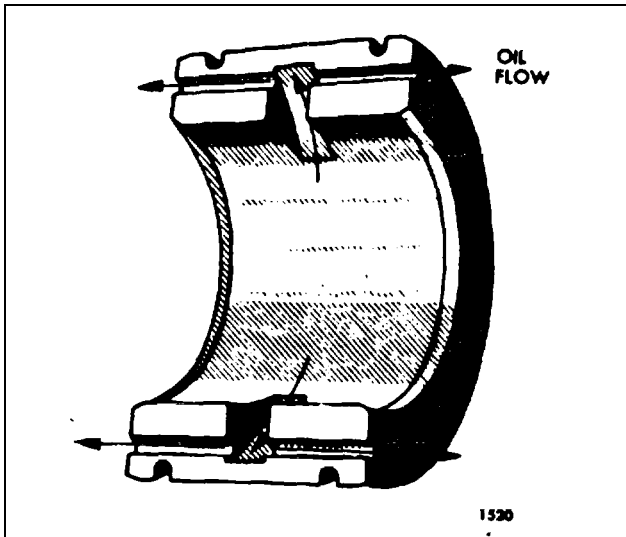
Camshaft Intermediate Bearing (Lower Half)
